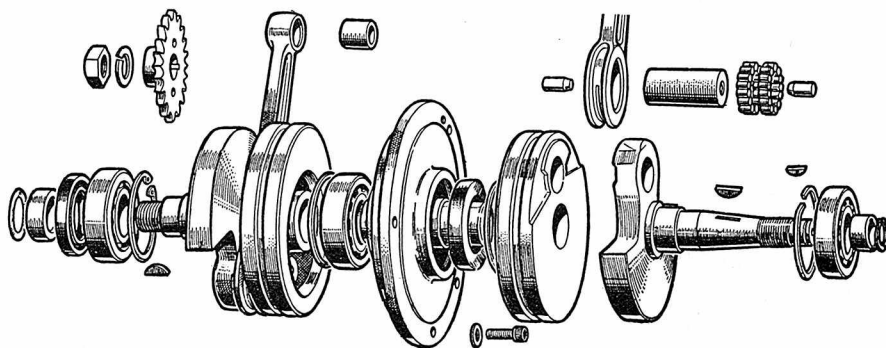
Exploded view of 2T and 3T crankshaft and associated parts.
